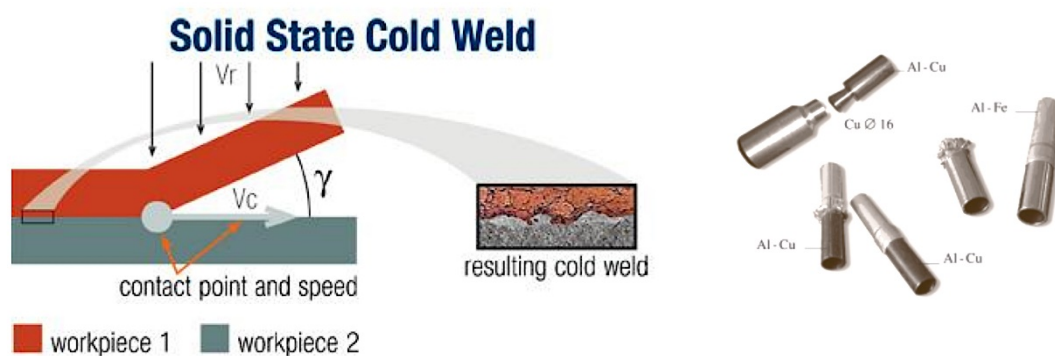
Electromagnetic pulse welding [20,21].
